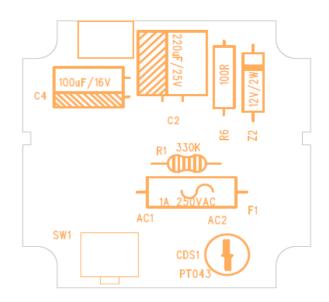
PCB layout for models LW3008; ENLMFANL-
